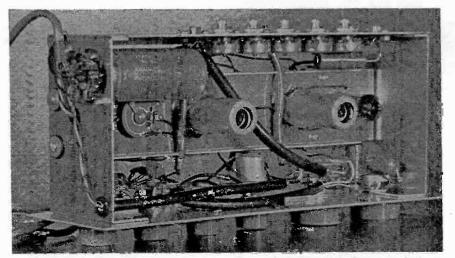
Completed preamp with its outer shell removed. Note shock-mounted chassis.
